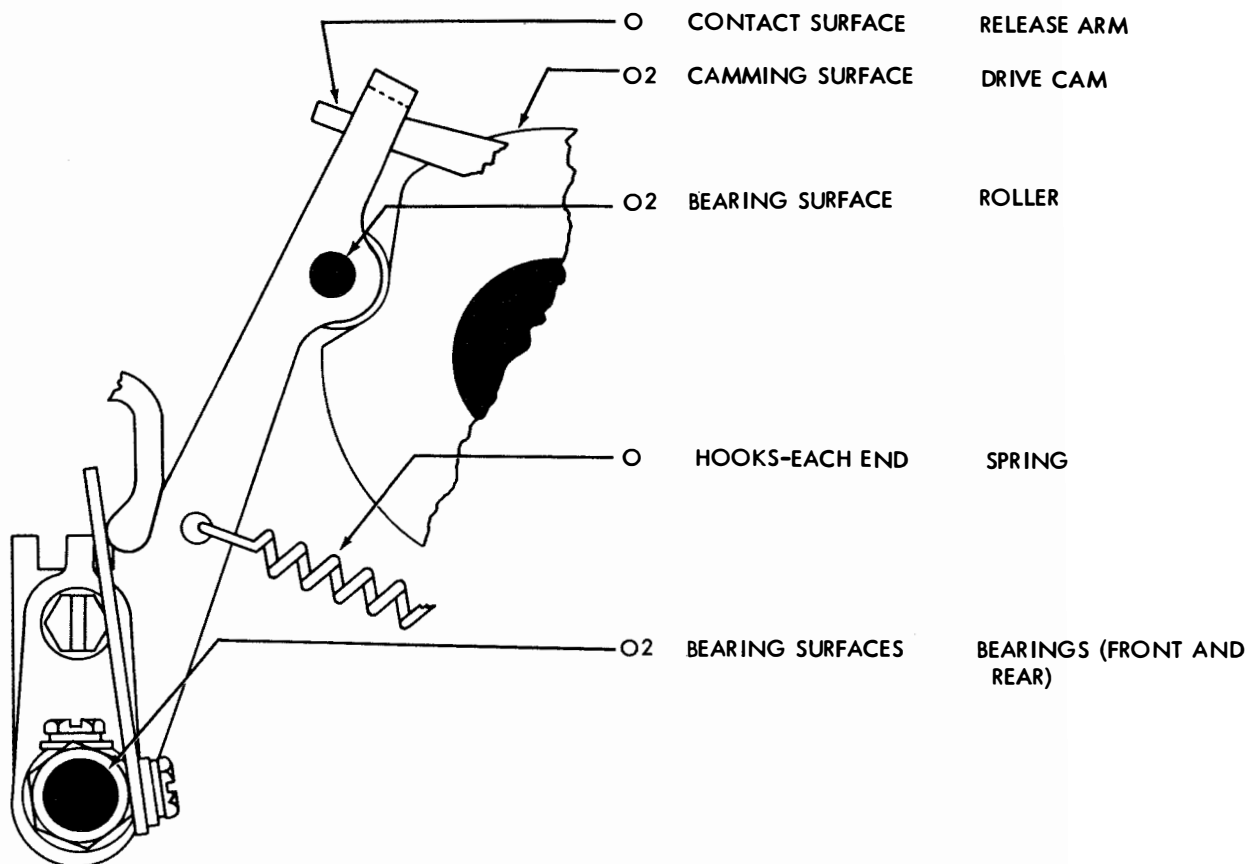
Tape Feed-Out Mechanism Lubrication
